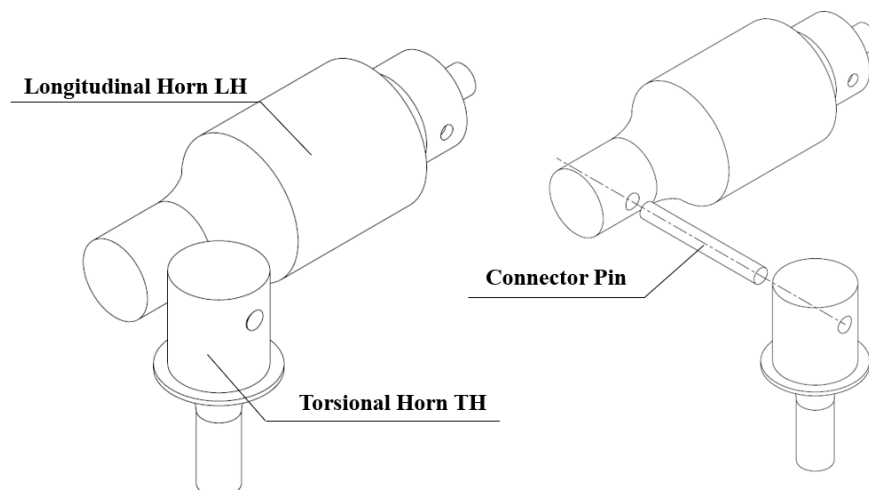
Pure torsion ultrasonic fatigue machine representation with an exploded view.
